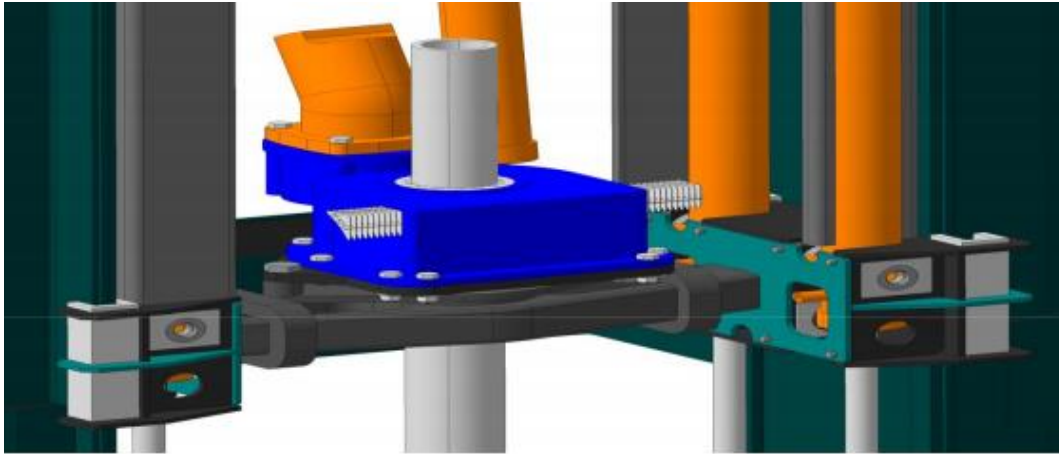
Model of the drilling rig rotator with the eccentric reducer.
